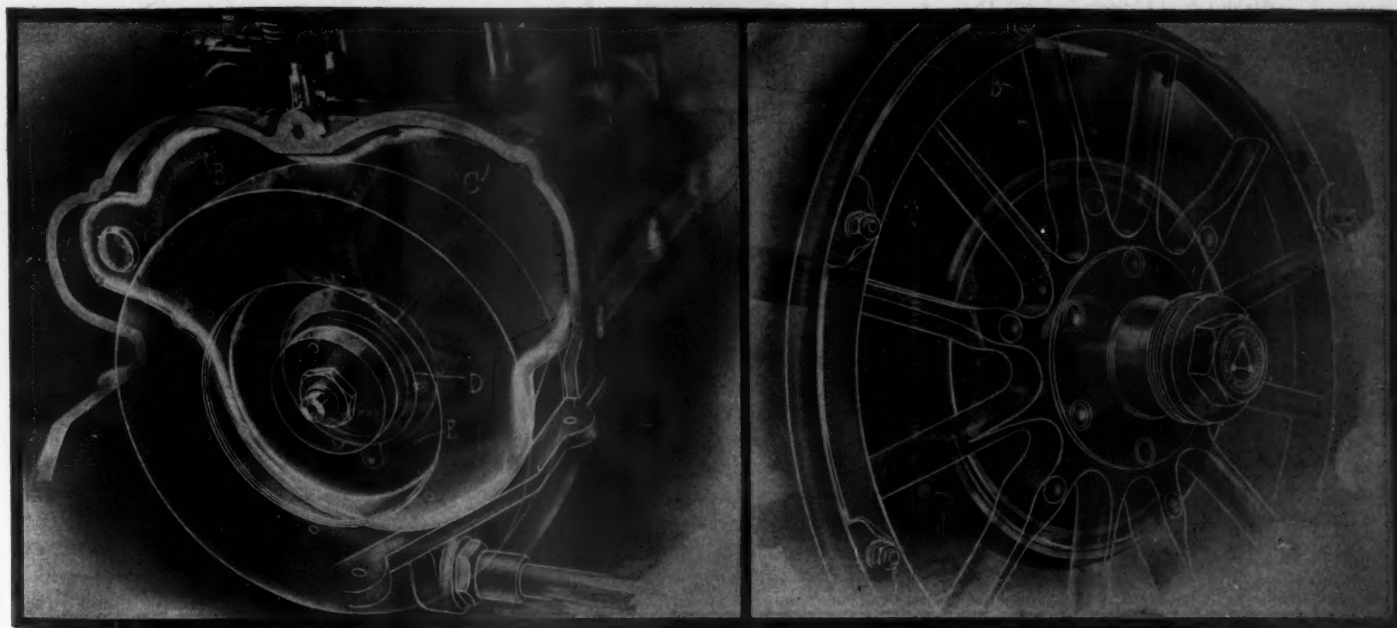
Phantom View on Left of Timing Gears. The Small Gear A at the Extreme Left Operates the Magneto, B Operates the Camshaft, C Operates the Layshaft, the Intermediate Gear D Drives Both Cam, Lay and Magneto Shaft Gears, as well as the Oil Distributing Gear E. The White Outlines are to Illustrate the Periphery of the Flywheel. On the Right Is a Phantom View of the Rear Wheel, Showing the Brake Construction and the Adjusting Thumb Nuts A and B and the Cross Rocker Shaft for the Service Brake
